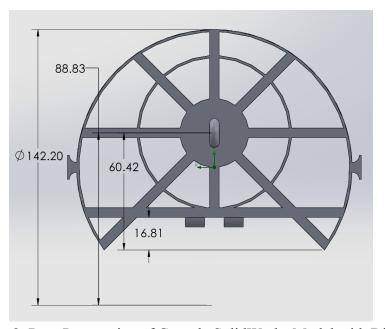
Rear Perspective of Capsule SolidWorks Model with Dimensions in Millimeters
